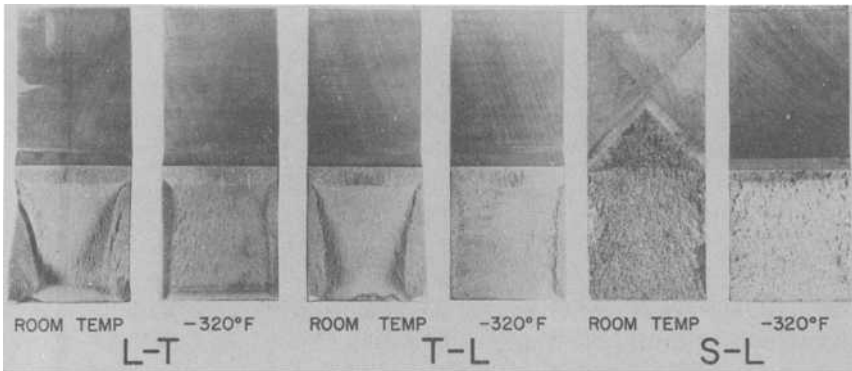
Fracture surfaces of compact fracture toughness specimens from 6061-T651 aluminum alloy plate, 3-in. thick.
